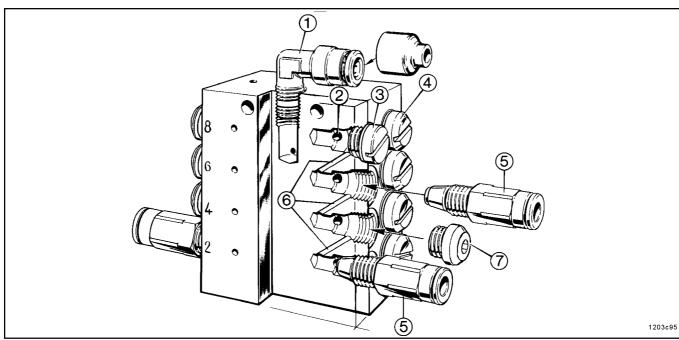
Install the outlet push-in type fittings and the closure plugs in accordance with the dosage
